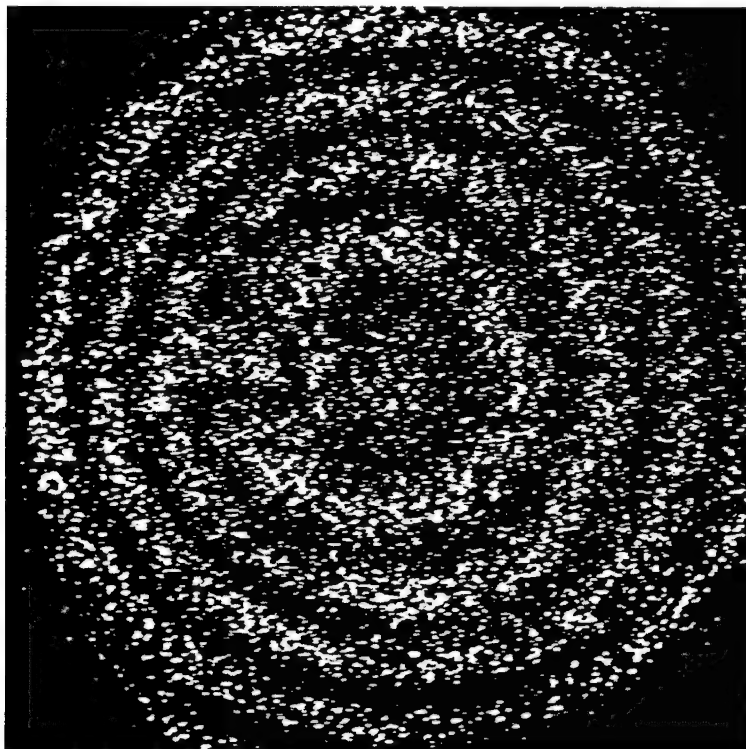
Fringe of ESPI (vacuum loading) reveals the crevice corrosion
